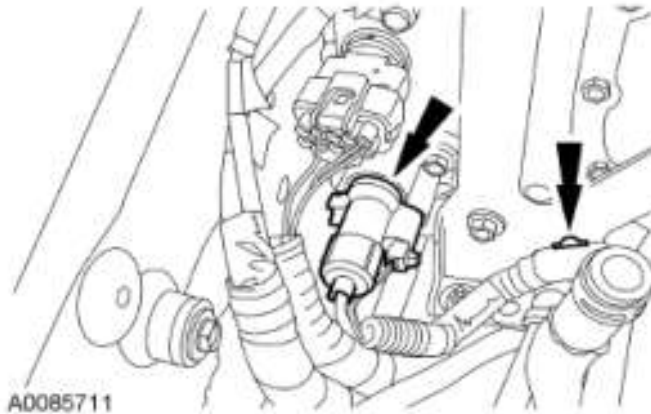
Locating DC-To-DC Converter Electrical Connector And Wiring Harness Retainers
